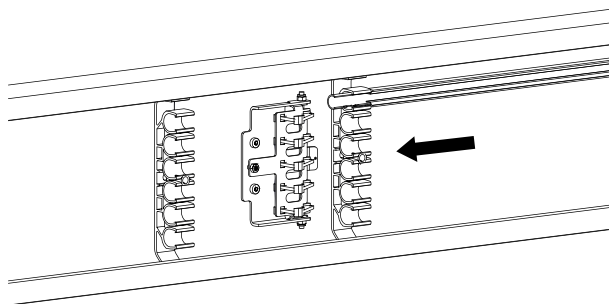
Slide conductor rail laterally into the hanger clamp and sliding contact sensor unit
